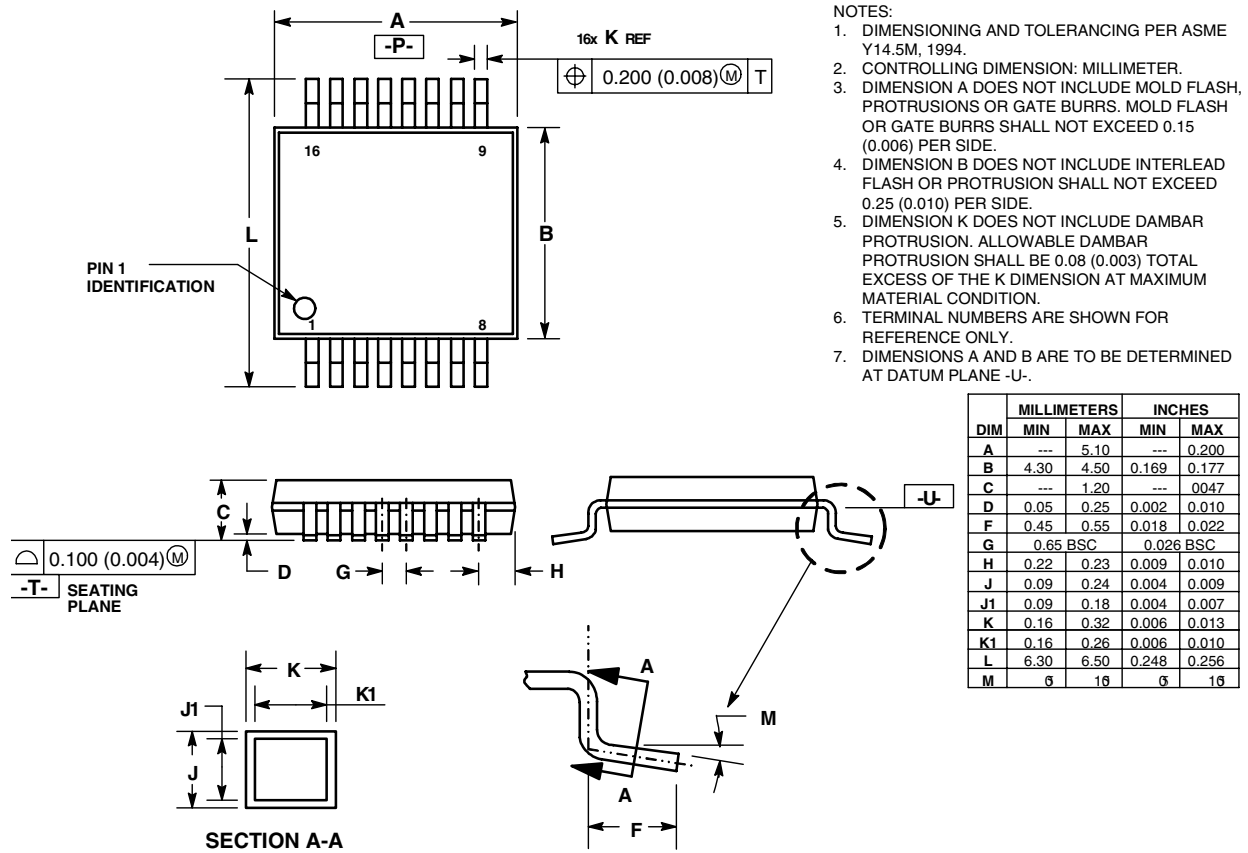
Outline Dimensions for DT Suffix, TSSOP-16
